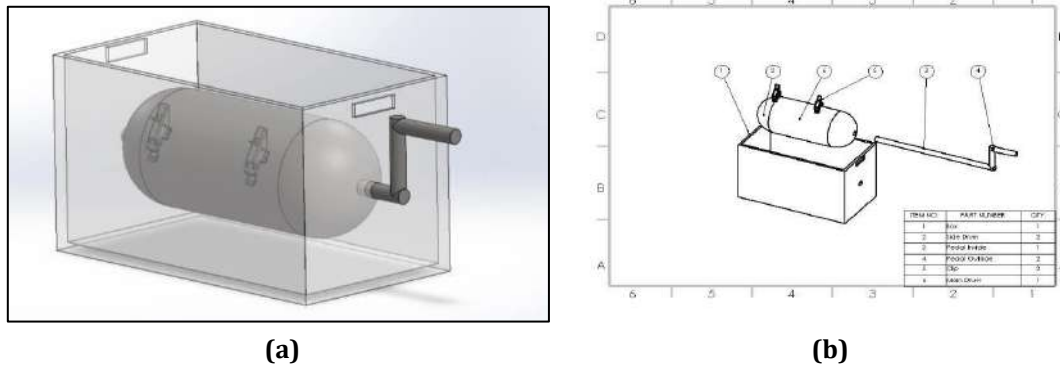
Drawing project using SolidWorks (a) Final project drawing; (b) BOM project
